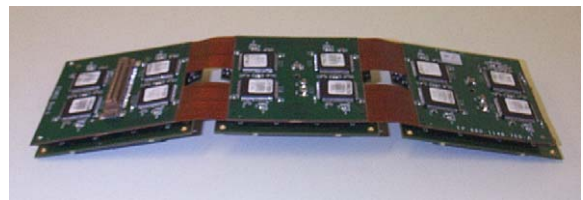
TRT end-cap front-end electronics printed-circuit boards. Shown is one set of three analogue boards and one digital board, which handles 192 channels.
